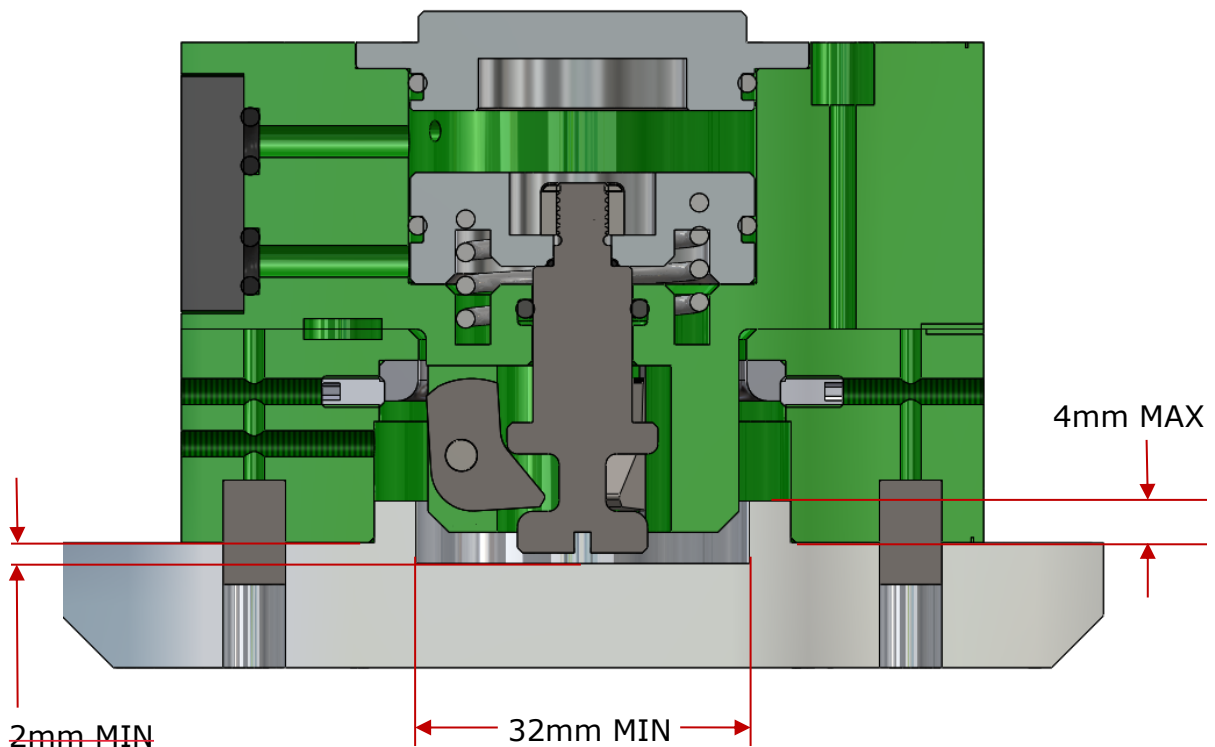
ET63 Tool Side and Tool Plate Installation (w/ Pilot)
